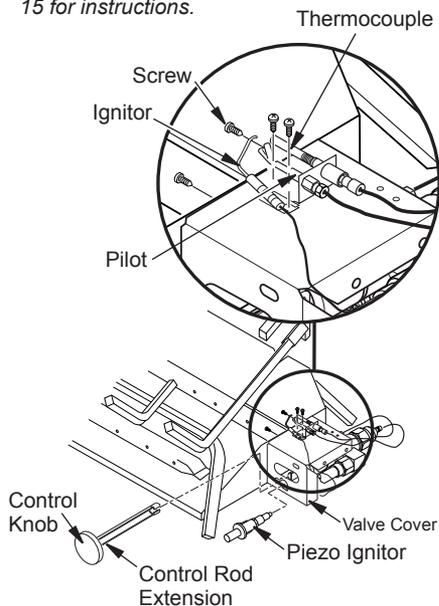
Installing Cover, Control Knob and Piezo Ignitor
